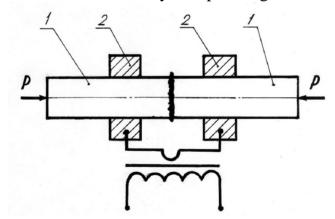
Scheme of resistance butt welding: 1 – work-piece; 2 – clamp
